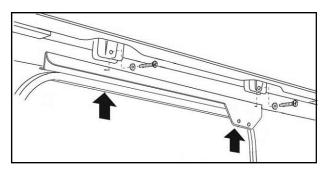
Attach Top of Side Frame to Grab Handle Mounting Points
